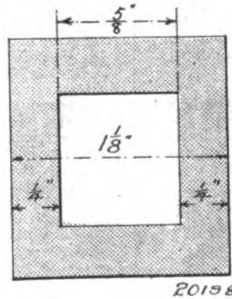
VALVE ACCORDING TO WORKING DRAWING.
